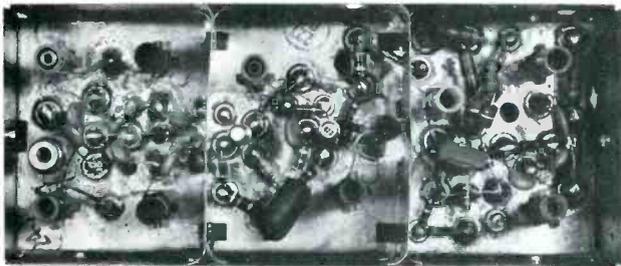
The transistorized IF section consists of a separate chassis contained in a shielded metal case.
